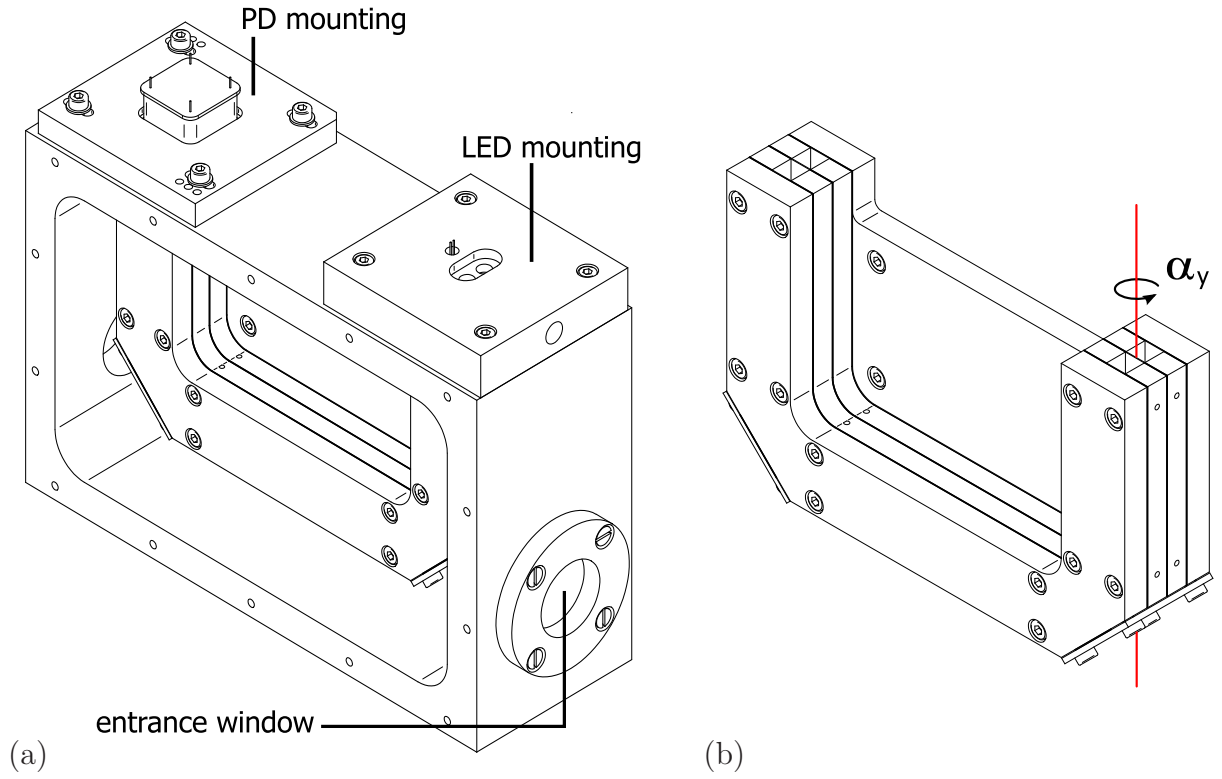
Parts of a technical drawing for the assembly of the prototype: (a) the box base body, already including the channel structure (b) of two parallel U-shaped channels.
